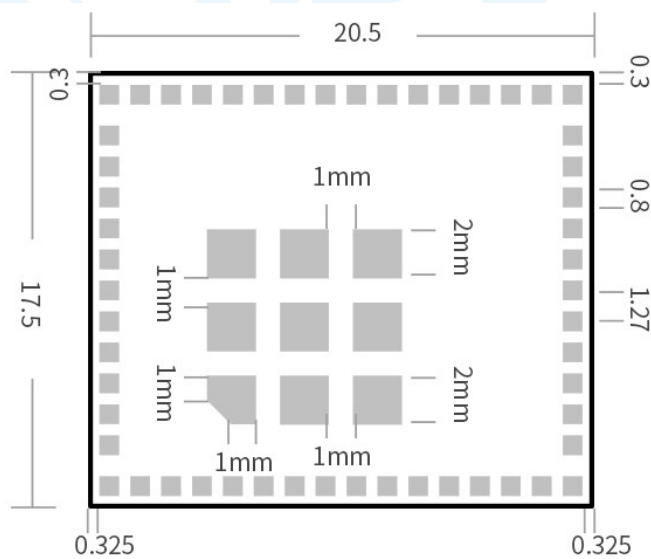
Recommended PCB Footprint of RF-WM-3235B1(S) (Top View) (mm)
